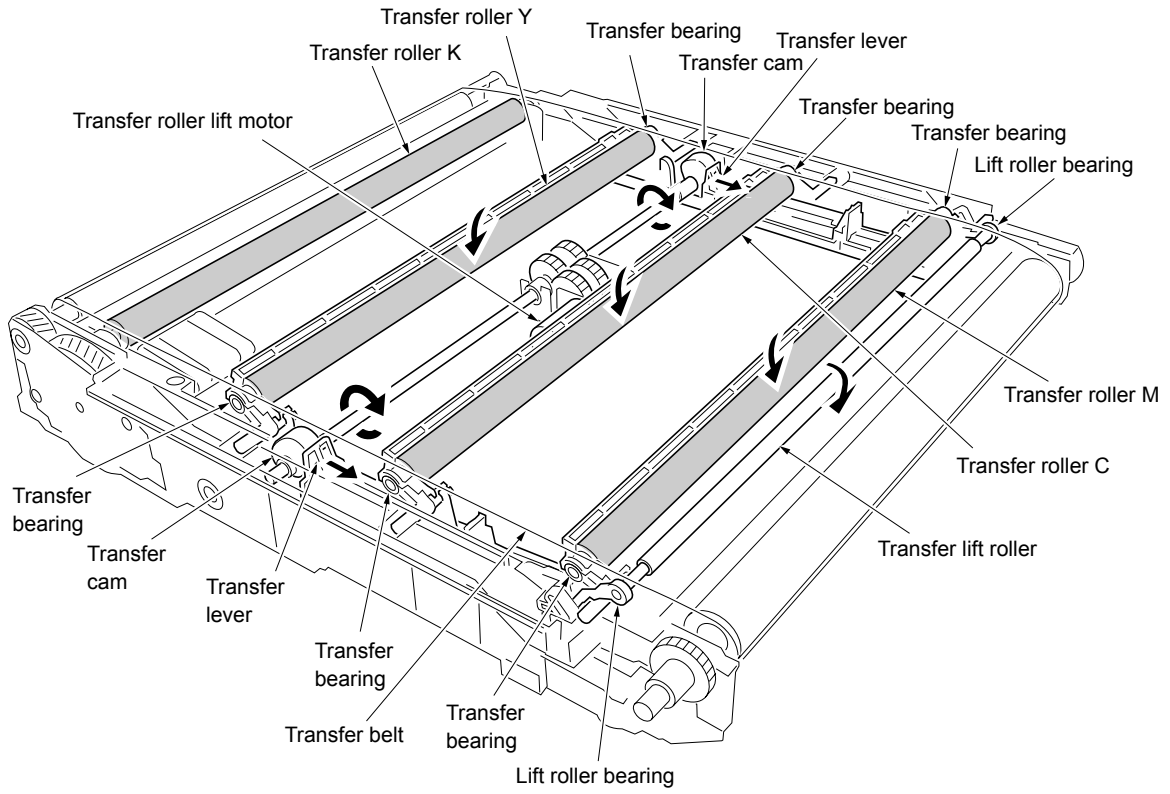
Transfer rollers Y, C, M lifter mechanism
